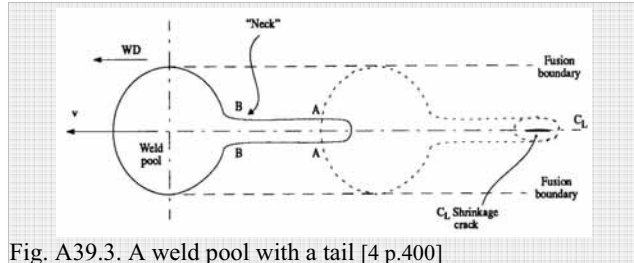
A weld pool with a tail [4 p.400]
